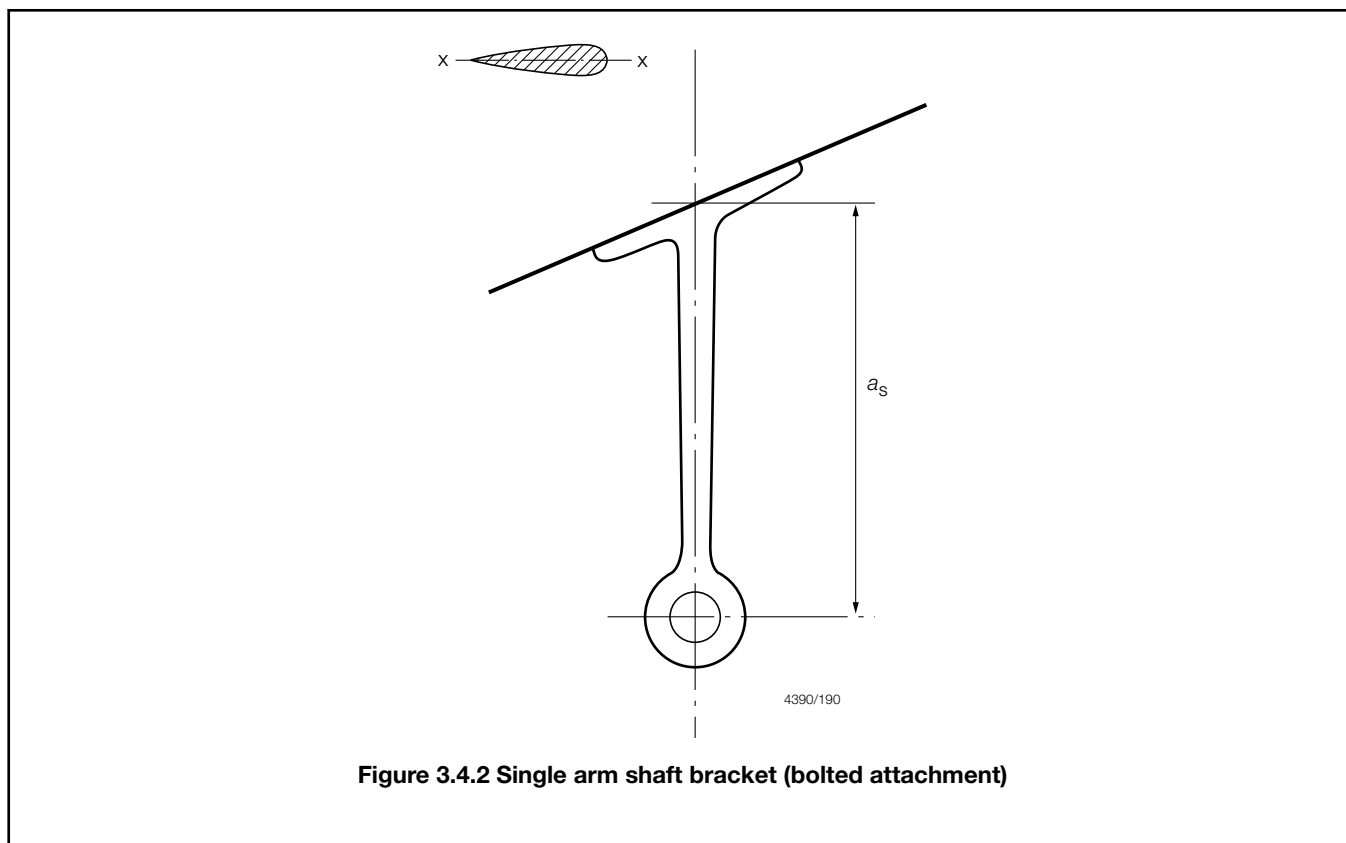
Single arm shaft bracket (bolted attachment)
